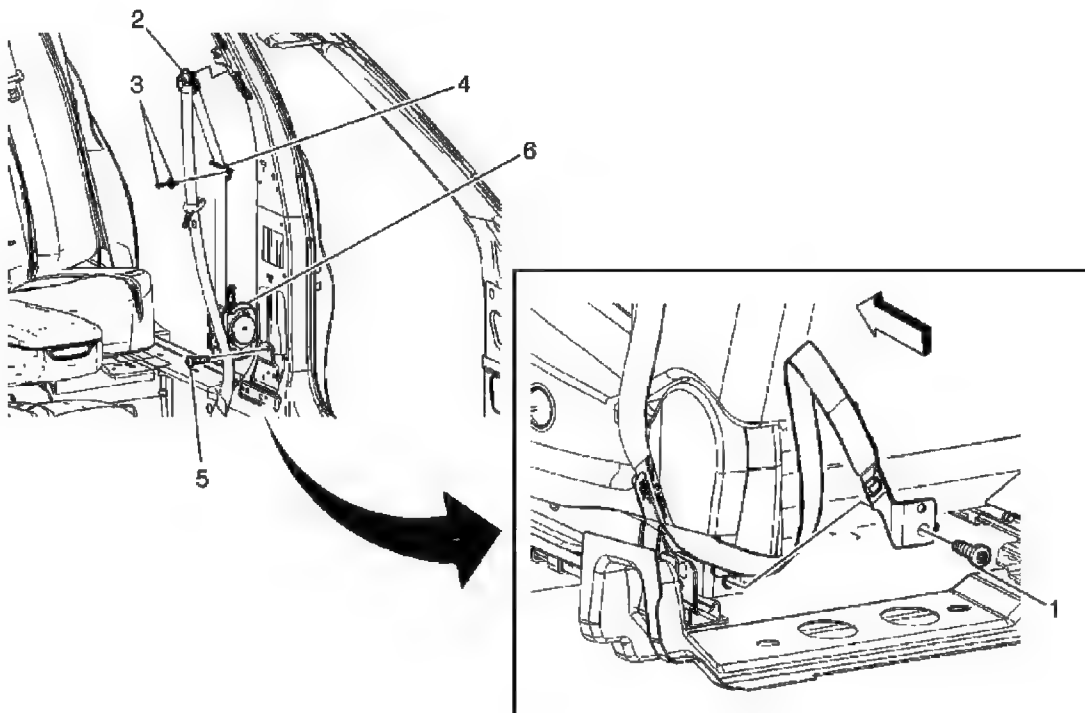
View Of Front Seat Belt Retractor Pretensioner
